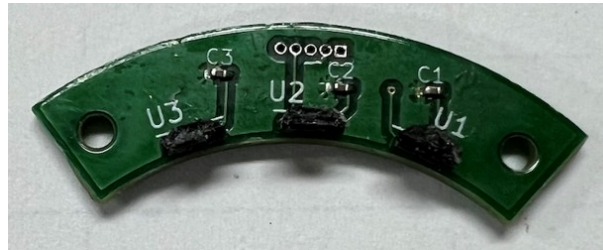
Fabricated Hall sensor PCB with mounted A3144 sensors and bypass capacitors.
